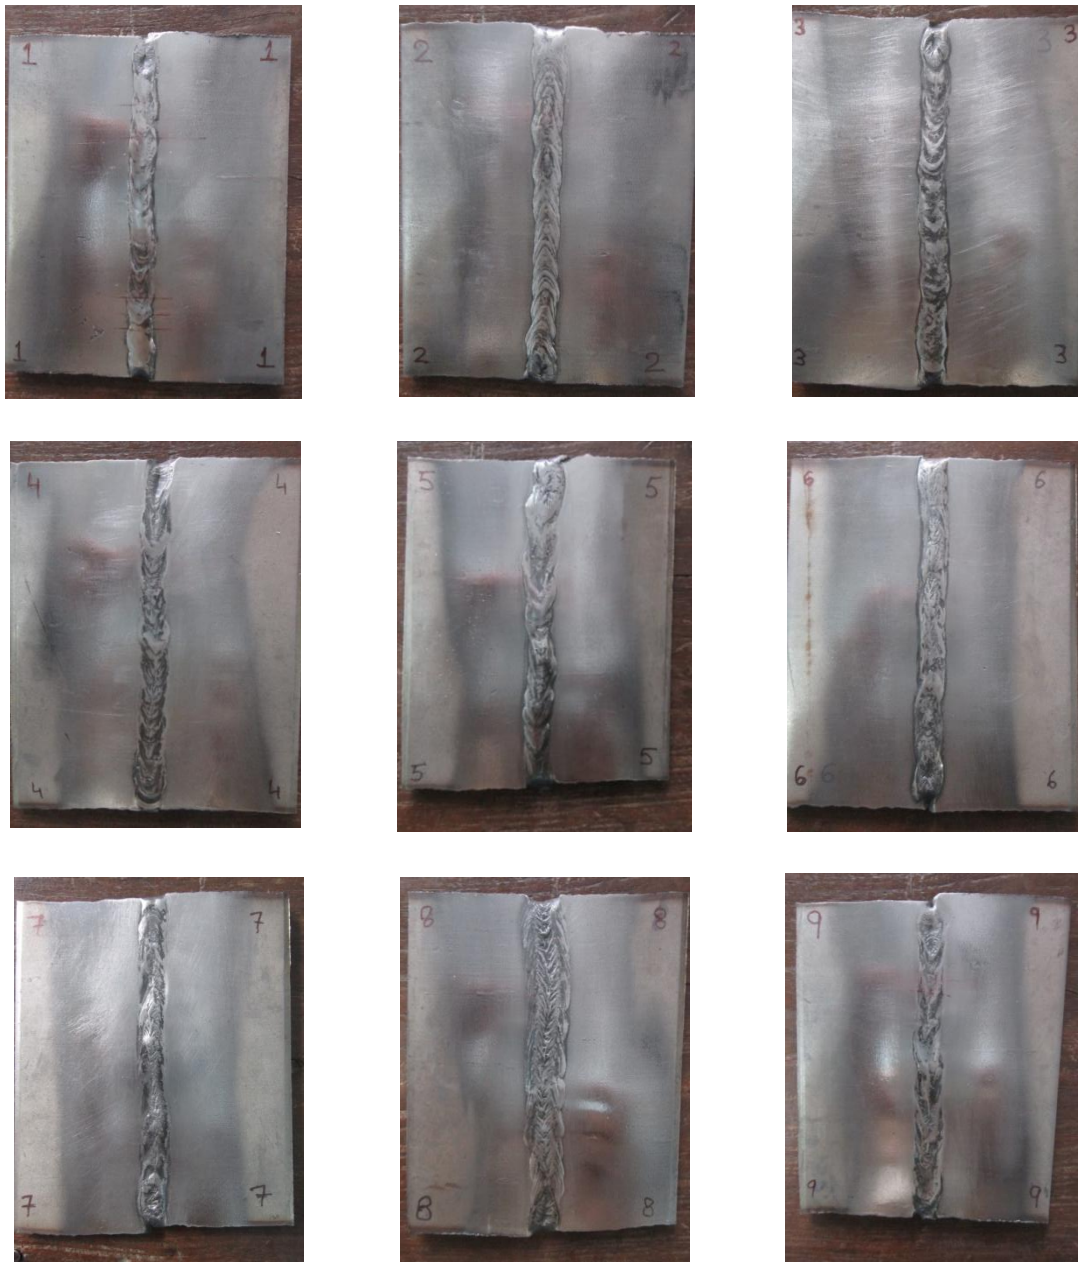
Specimens of SS 304 grade stainless steel immediately after welding
